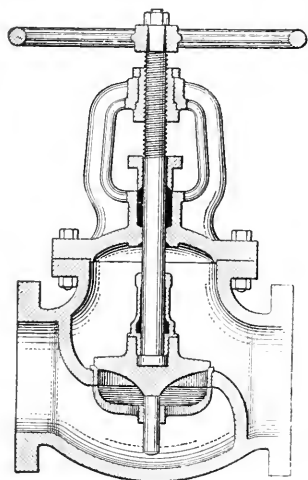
IRON BODY GLOBE VALVE—BRASS-MOUNTED.
